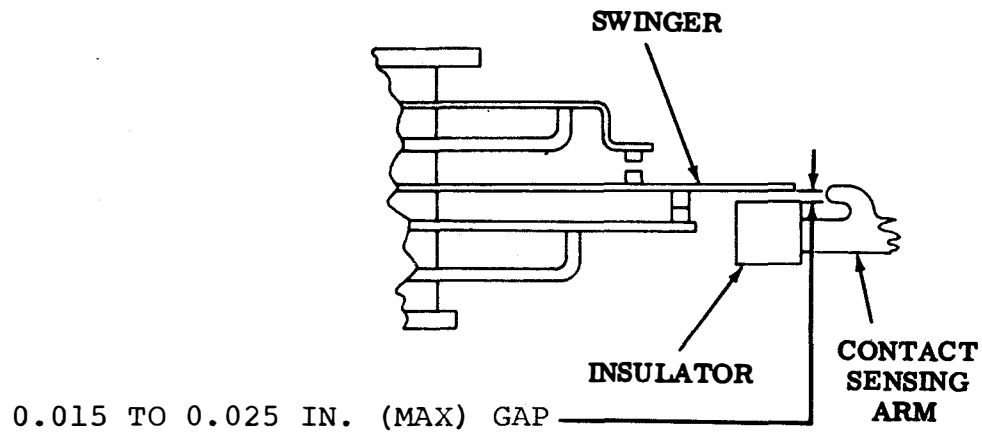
Contact Swinger - Sensing Arm Clearance, Front View
